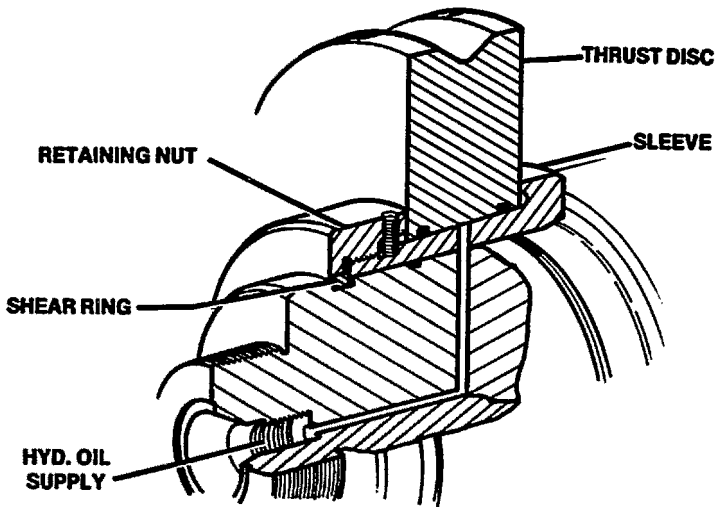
Hydraulically fitted thrust disk. (*Dresser-Rand Company, Olean, N.Y.*)
